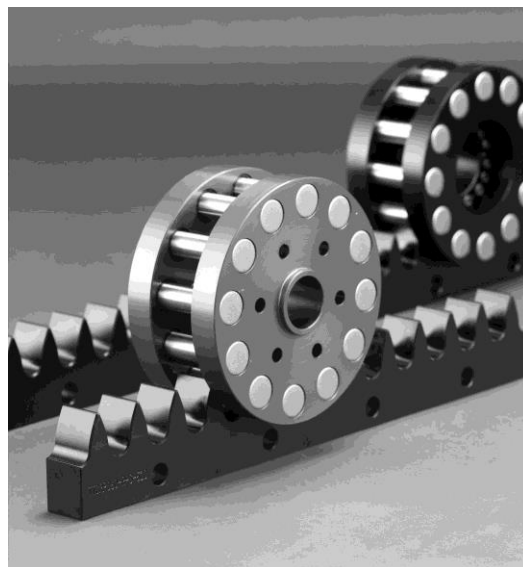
Example of typical roller pinions engaged on toothed linear racks
